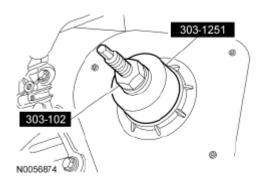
Removing Crankshaft Front Seal Courtesy of FORD MOTOR CO.
